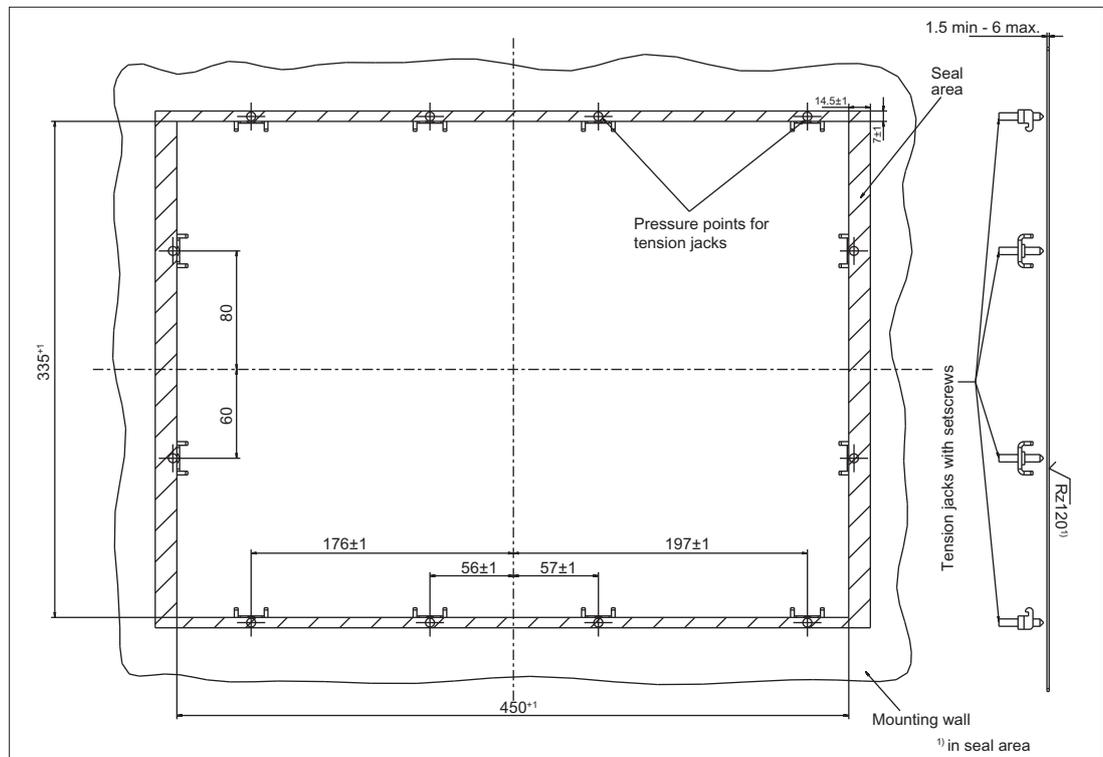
Dimension sheet for mounting the TP 015A operator panel front
